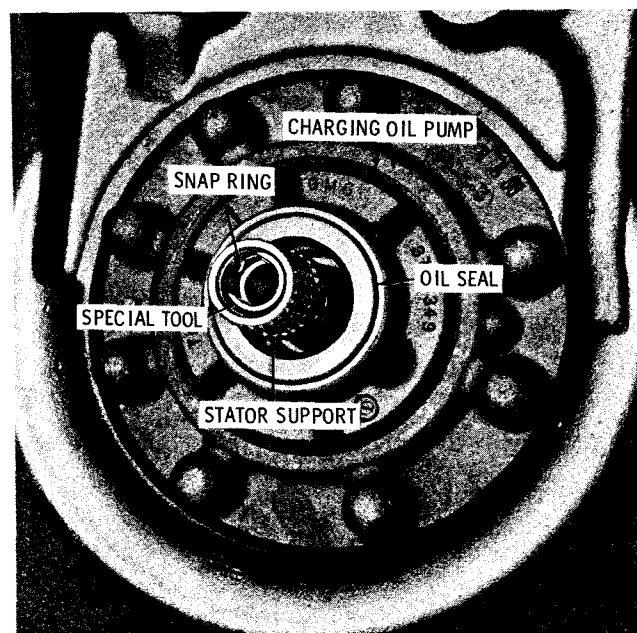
Using special tool to remove converter unit assembly (TC 250)
